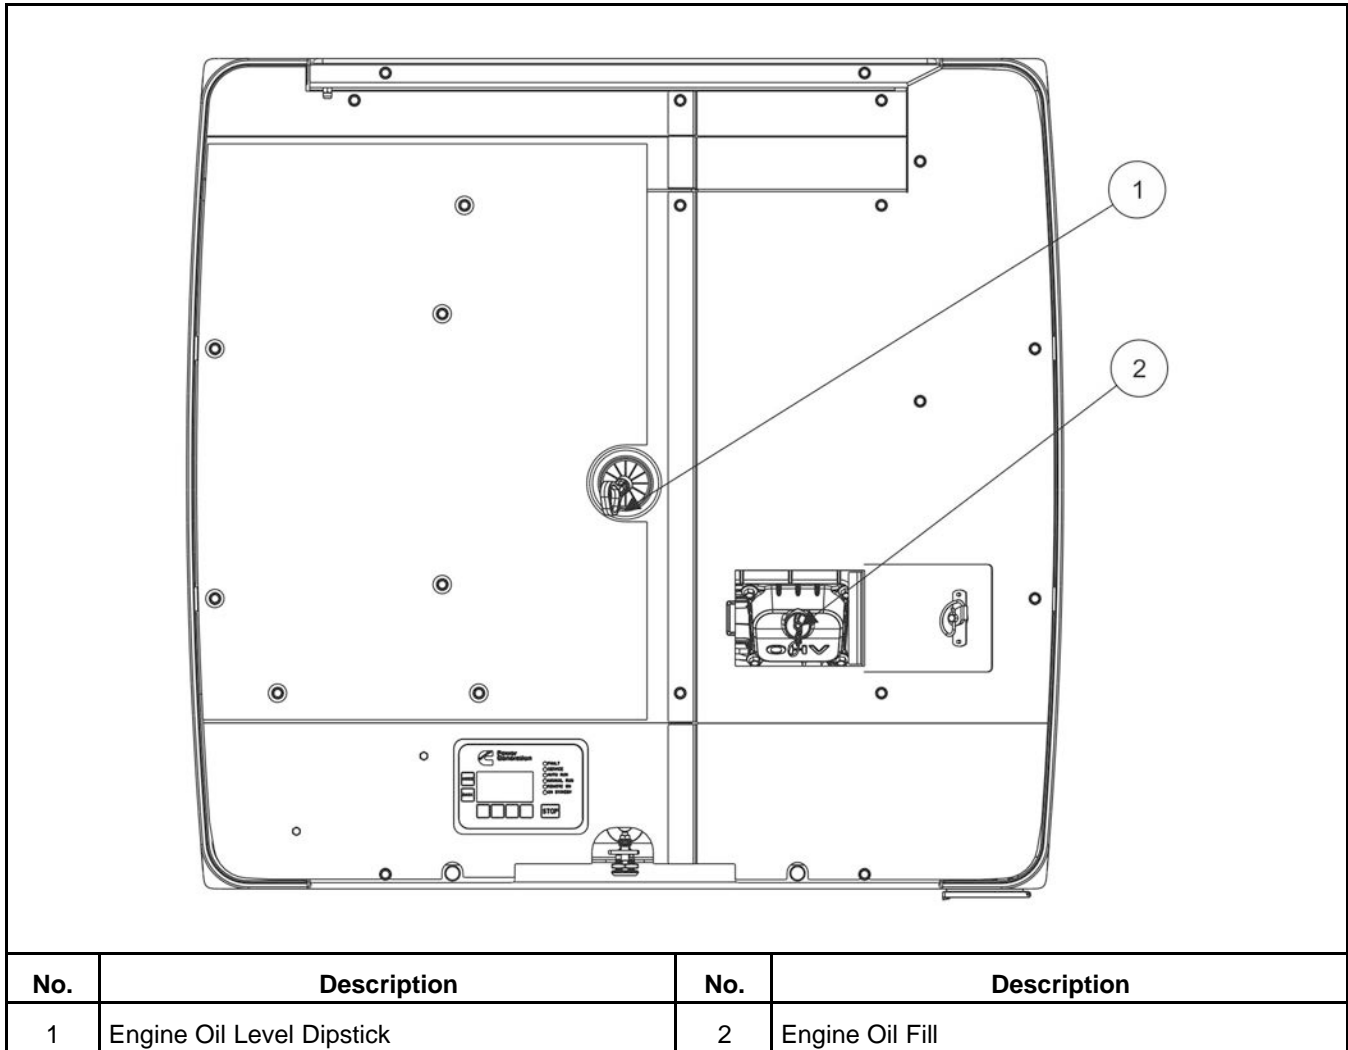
ENGINE OIL COMPONENTS (TOP VIEW)
